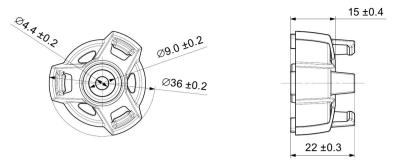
Dimension drawing of spacer 6GT2690-0AK00
